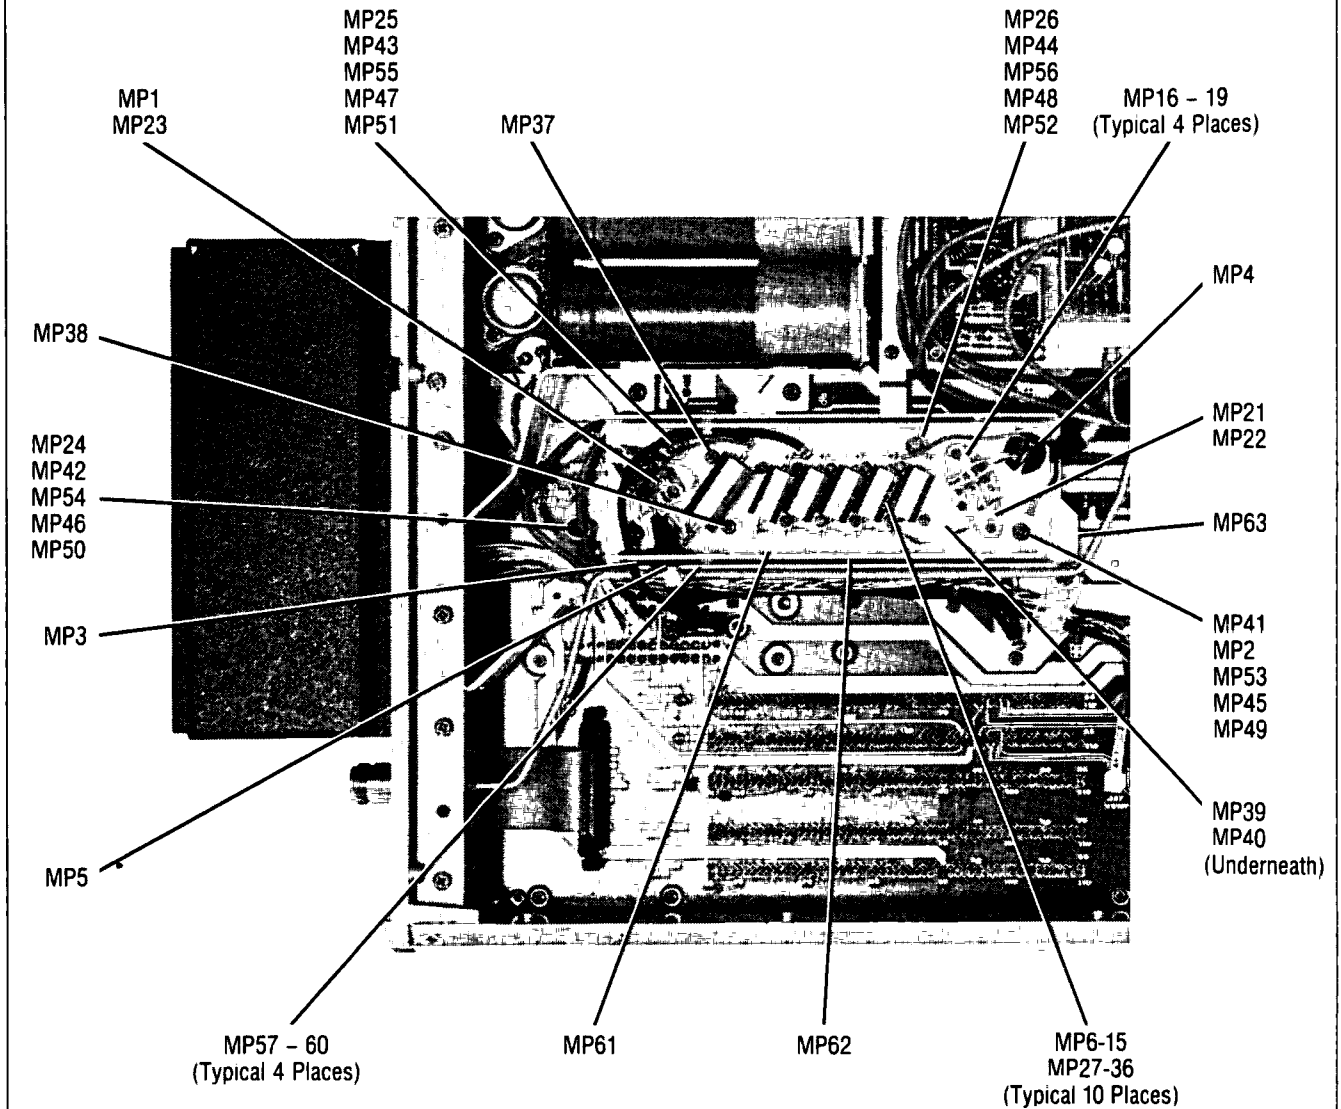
A47 Sense Resistor Assembly Mechanical Parts Location
